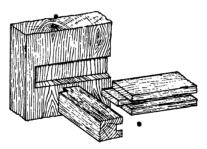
Fixing Framing of Dressing-chest Rails and Bearers.
